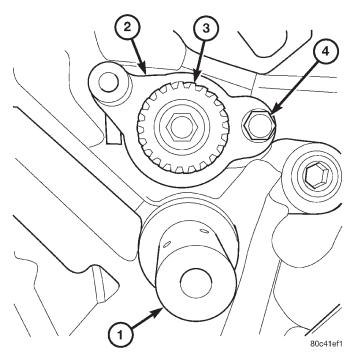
COUNTERBALANCE SHAFT RETAINING PLATE
